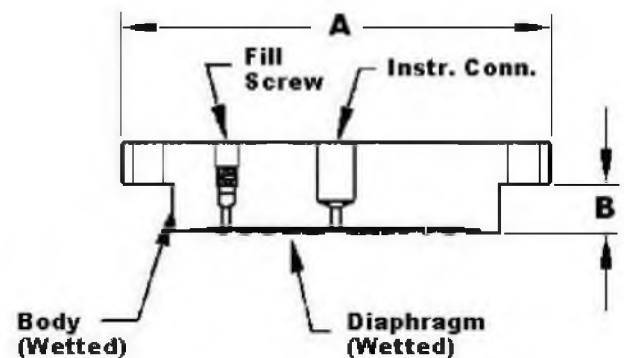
Seal Dimensions (Chemical TEE "Taylor Wedge" Seals)
